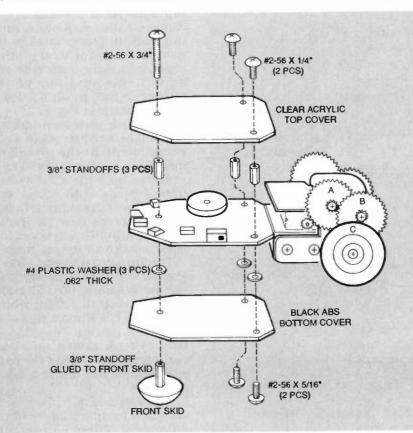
MOUNT THE TOP AND BOTTOM COVERS and front skid as shown here. To align the two motor gears, loosen the top screws and adjust the position of the motors.
